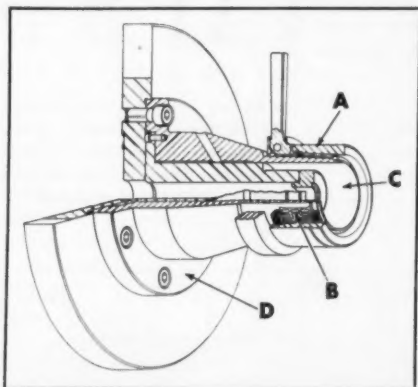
Scully-Jones Special "Roll-Lock" Chucking Fixture designed for use by Allis-Chalmers Manufacturing Company in hobbing tractor drive pinions
